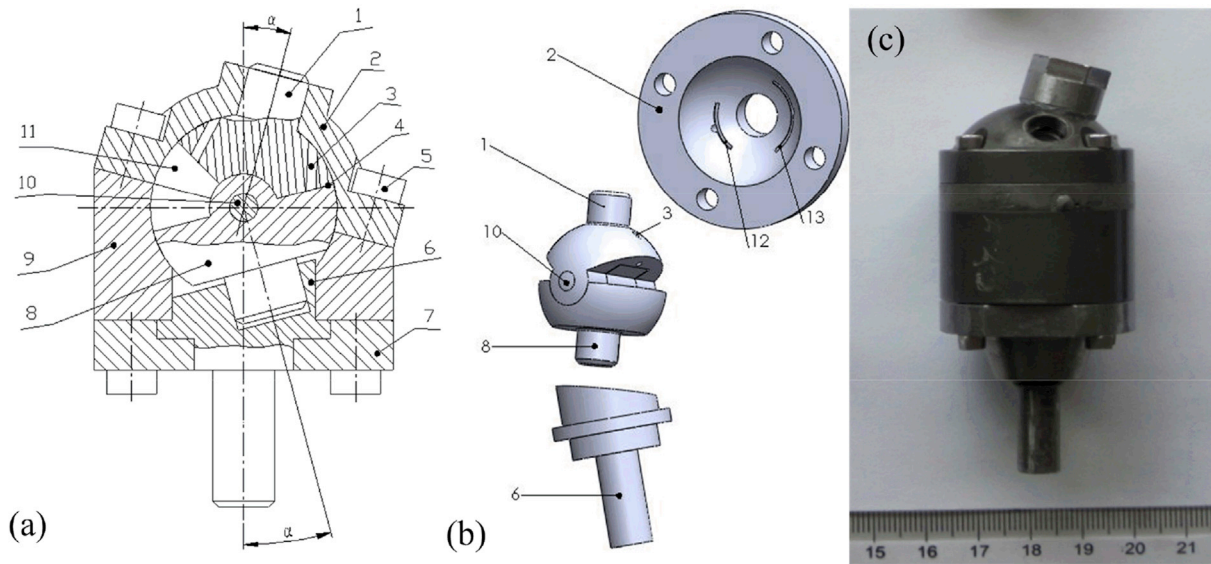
Spherical pump (a) sectional schematic (b) 3D view (c) prototype [1].
